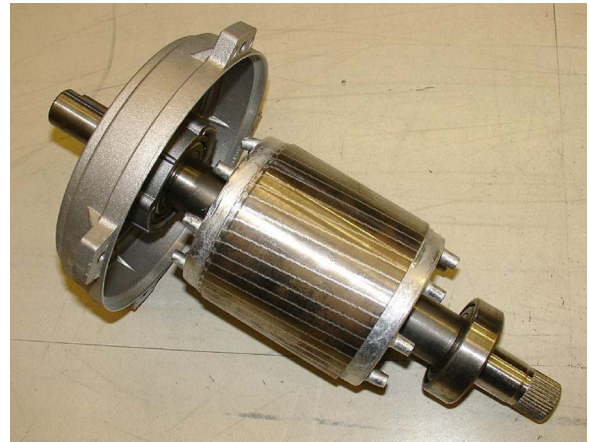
Picture of the machine rotor, with bearings and end caps.
